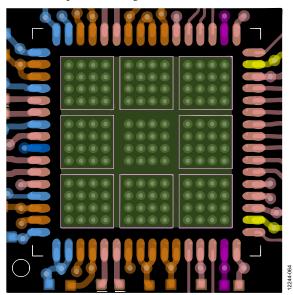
Recommended PCB Layout of Exposed Pad for the AD9234
